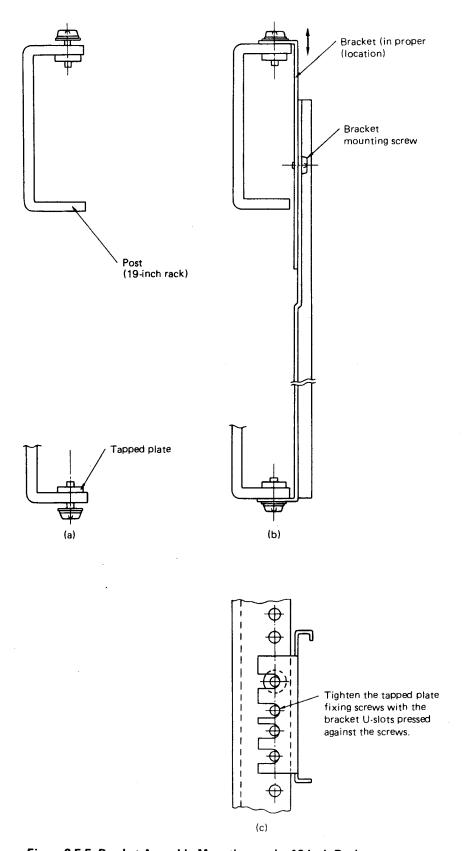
Bracket Assembly Mounting on the 19-inch Rack
